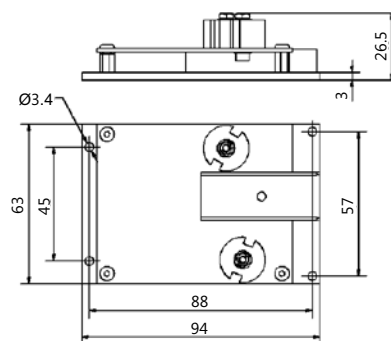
Outline drawing of PCD-UHRS series drivers with conductive pad
